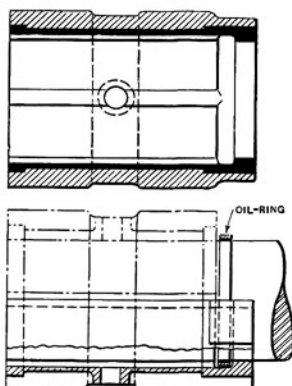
Solid Bearing Box babbitted in Fixture Shown in Fig. 6
